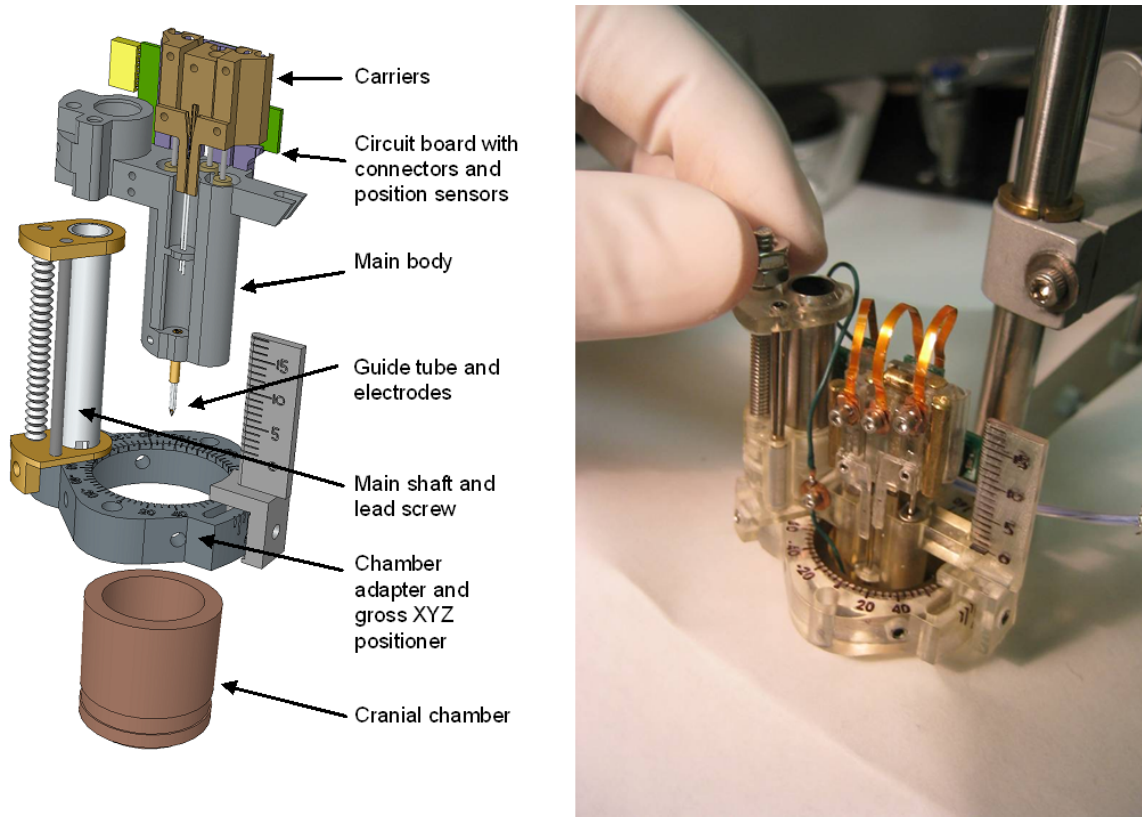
Exploded sketch and photograph of the latest version of the movable array testbed. Drawing by J. Cham from [9].
